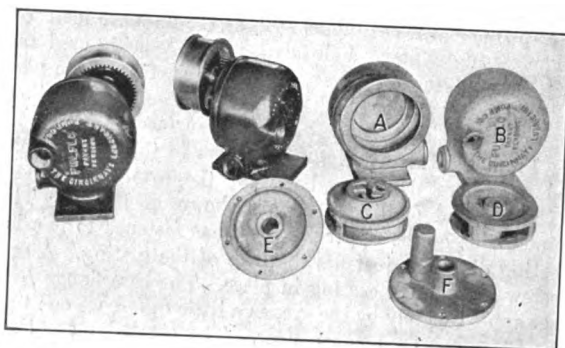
FINISHED PUMPS AND PRINCIPAL PARTS
